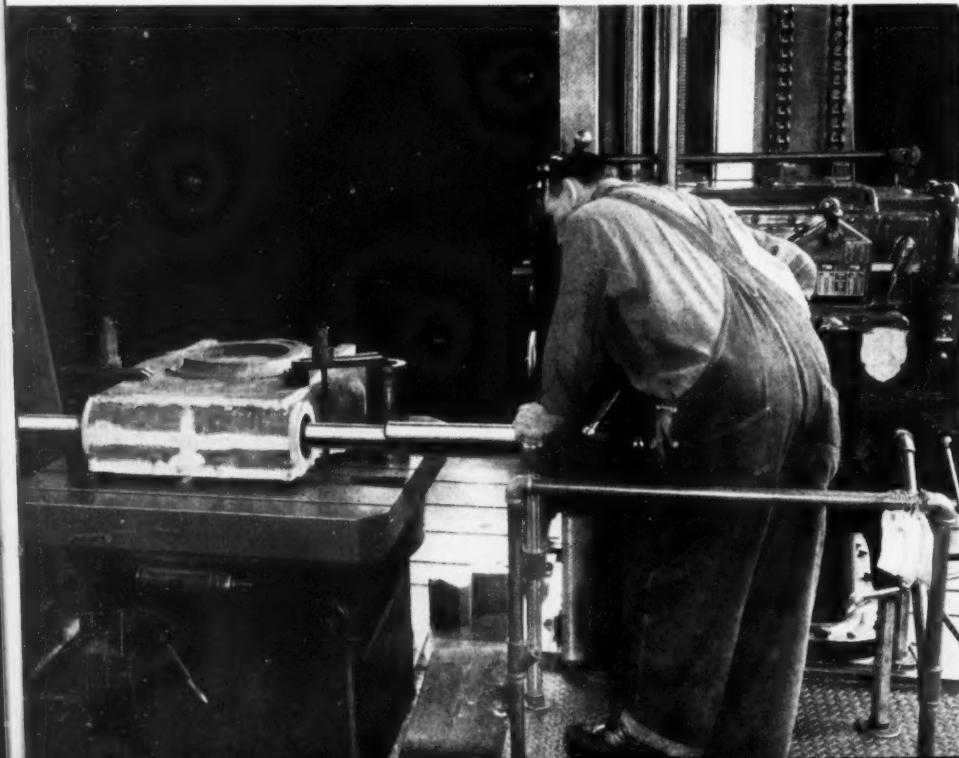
Employing a Horizontal Boring, Drilling, and Milling Machine for Finishing Bearings in a Worm-gear Housing within Unusually Close Tolerances
